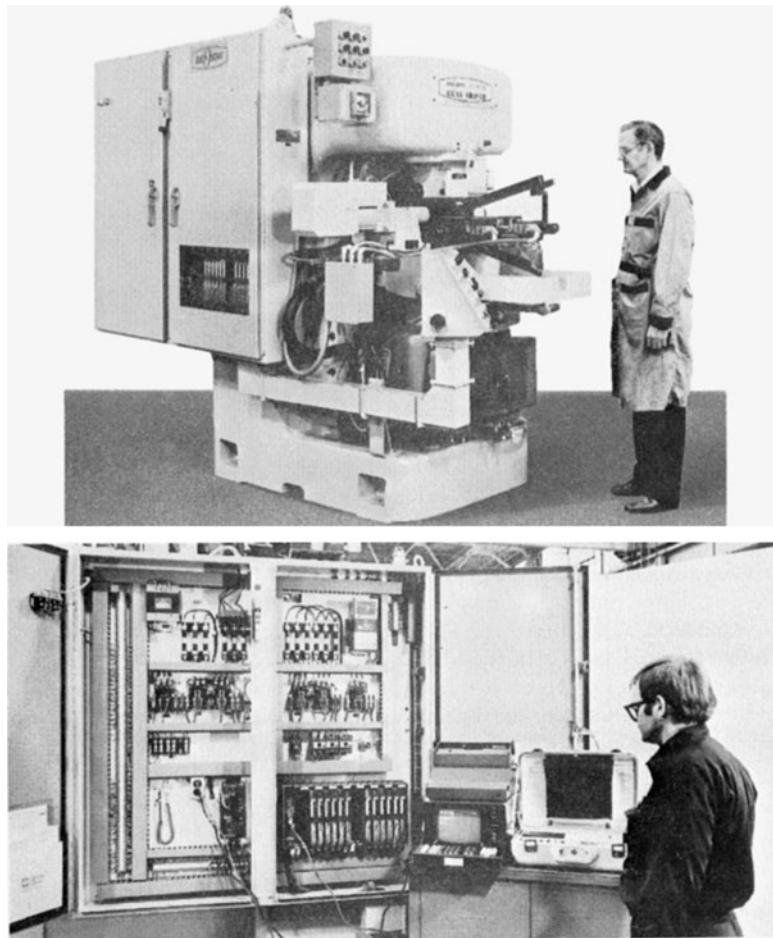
Gear-shaving machine equipped with programmable controller. (Courtesy of National Broach and Machine Co., a division of Lear Siegler, Inc., Detroit, Michigan.)
